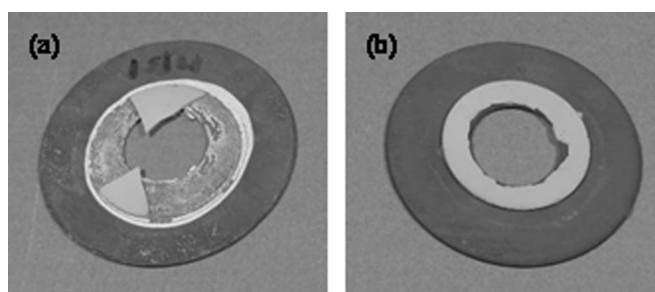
Joining samples after rupture testing: (a) specimen joined using a 50 mol % CuO composition and (b) specimen joined with a 1 mol % CuO braze.
